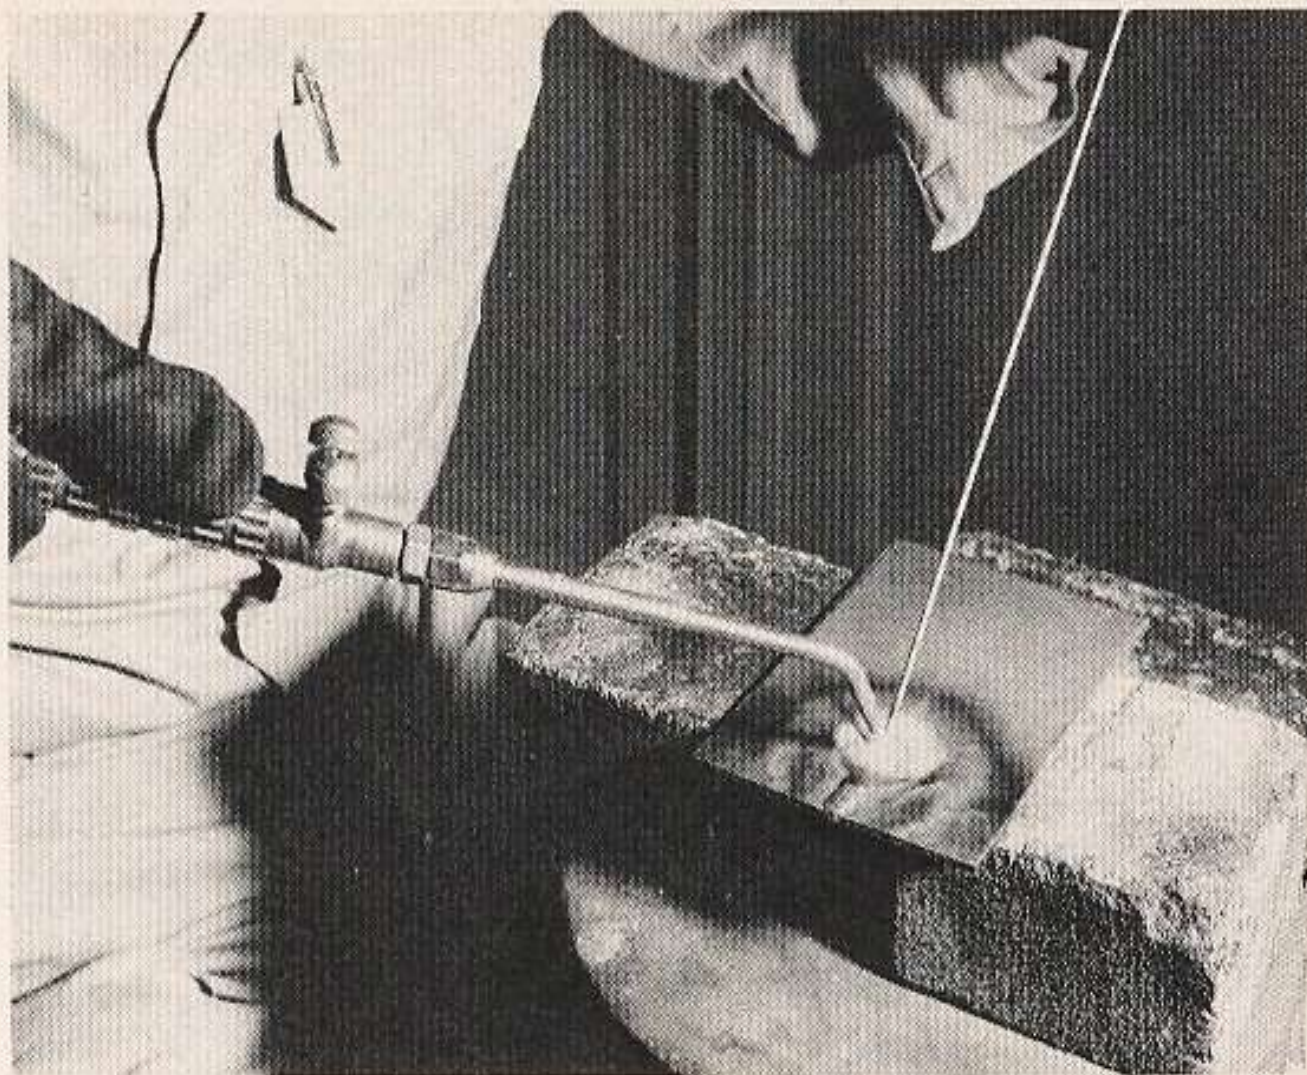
Using oxyacetylene welding process.
